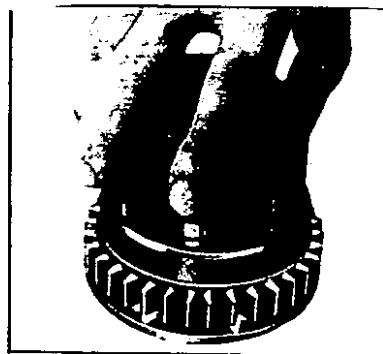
Fitting the synchronizer hub to the coupling sleeve.
